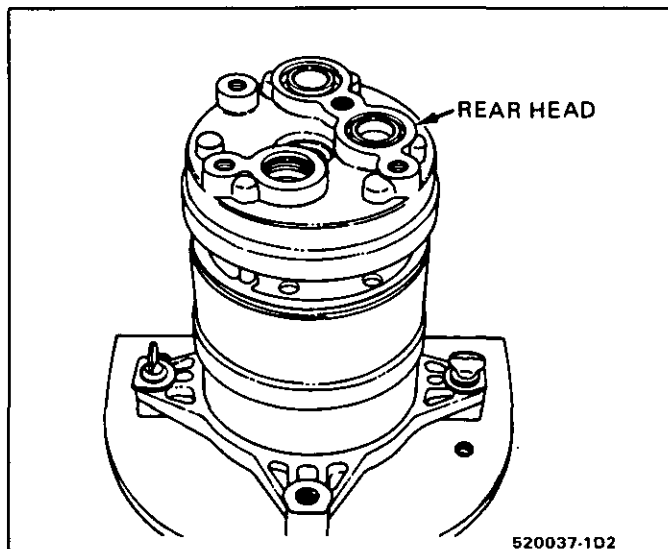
Rear Head Assembled Onto Assembly Guide Pins
